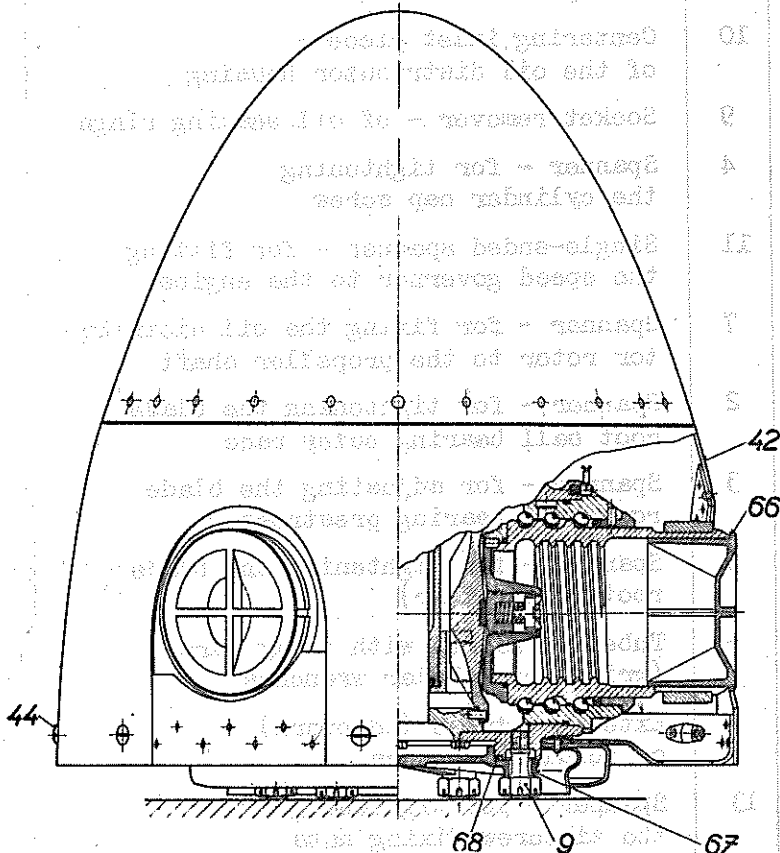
Due positioning of the airscrew hub after having taken it out of the transport case.
